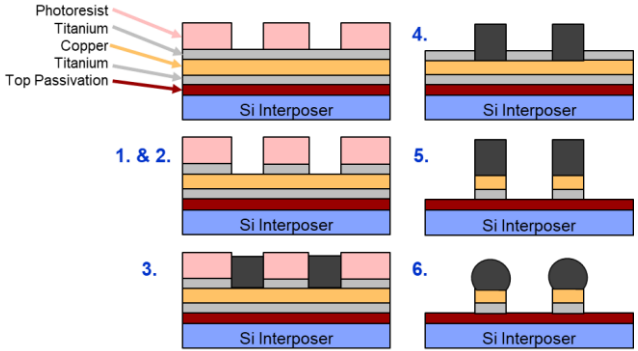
Electroplating processing steps to prepare wafers for flip chip bonding. The first steps involve etching the top Ti layer to expose Cu contacts and removing Cu surface oxides (1&2). Next, SnAg solder is plated (3) and the photoresist is removed (4). Remaining seed metal is etched (5) and the solder bumps are reflowed (6) before they are ready for flip chip bonding.
